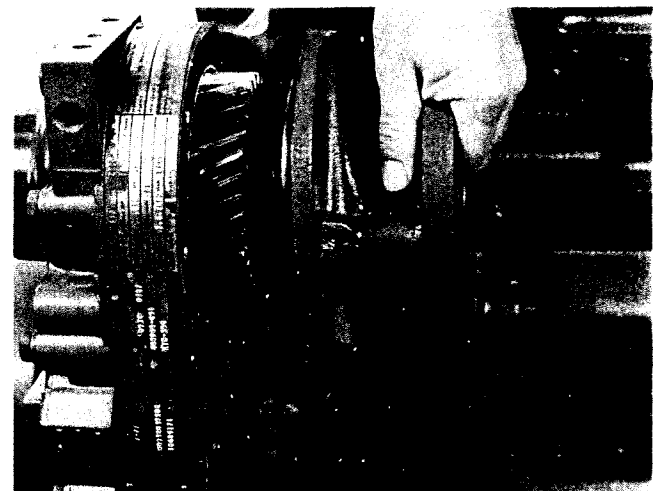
, (N100144). Removing fuel pump/compressor drive
